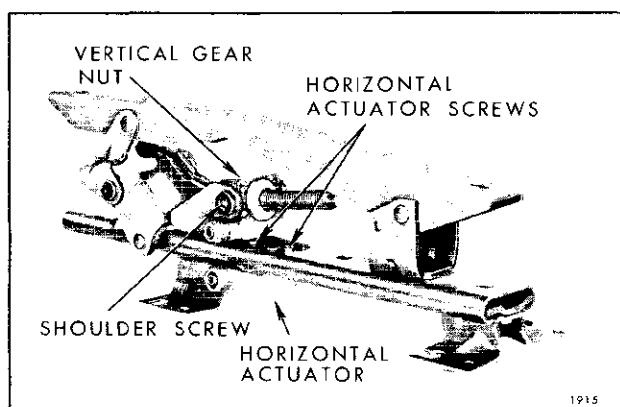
Four-Way Seat Adjuster — "A" Styles
